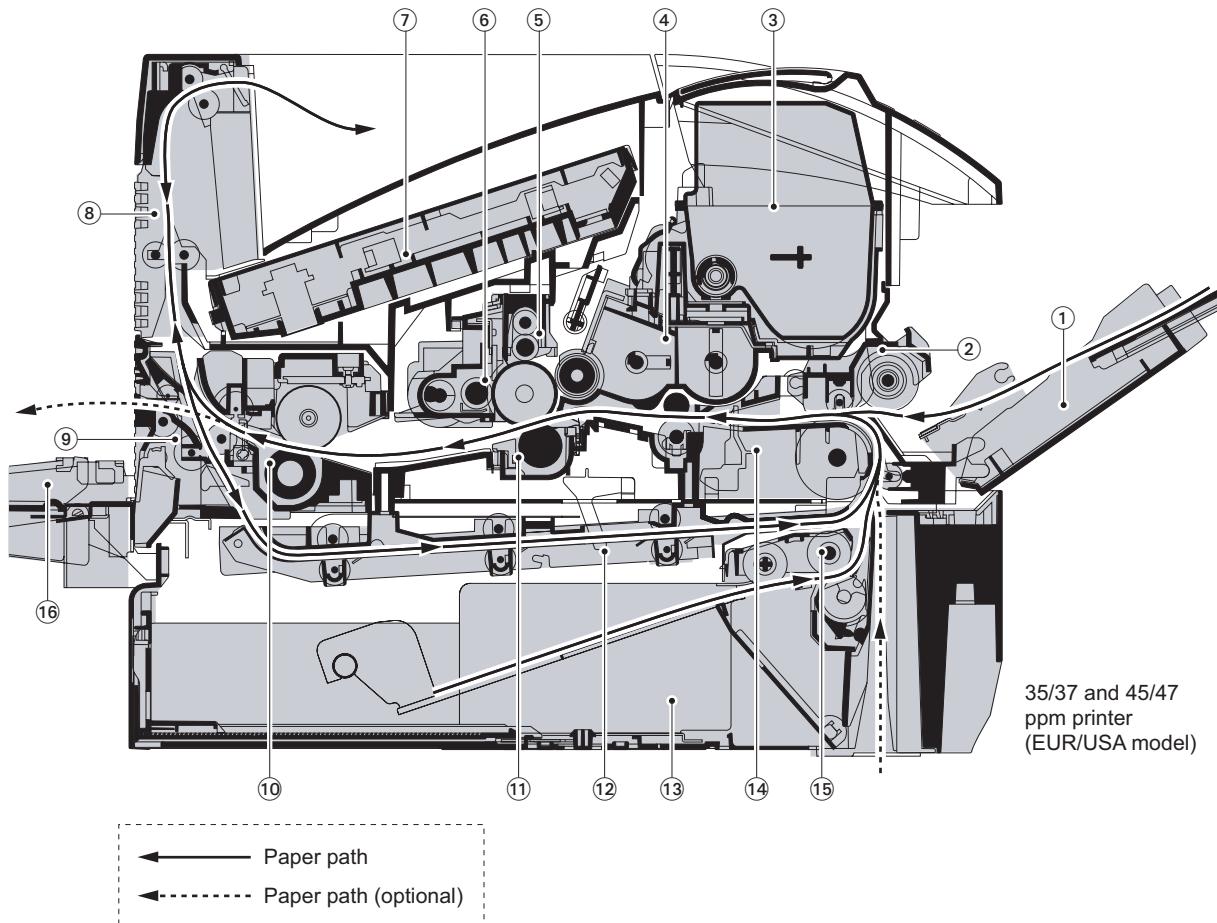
Machine cross section (35/37 and 45/47 ppm printer [EUR/USA model])
